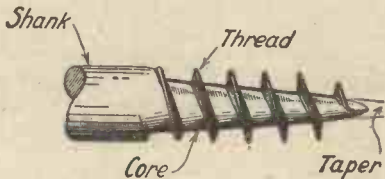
A wood screw thread is thin, so that it can cut into the fibres of the wood.
